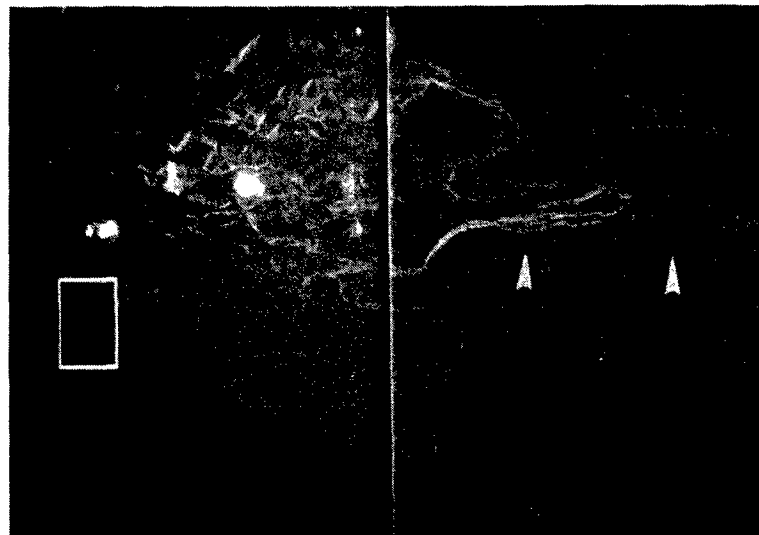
Box at left shows edge of fracture (upper) and keyway surface (lower). Mag: 50x
